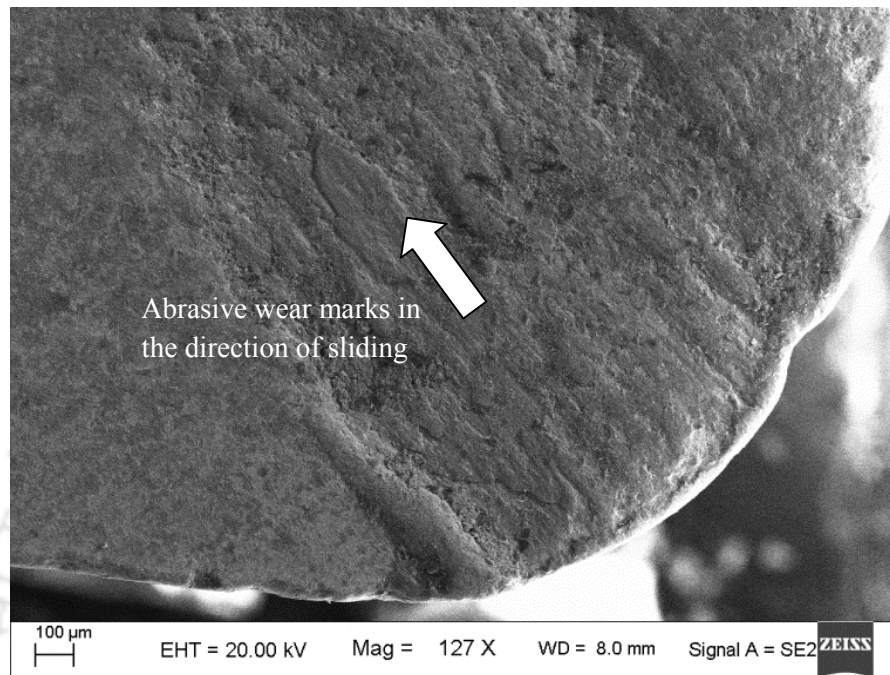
(a) Rake surface of the cutting tool without CaF_2 showing severe wear
